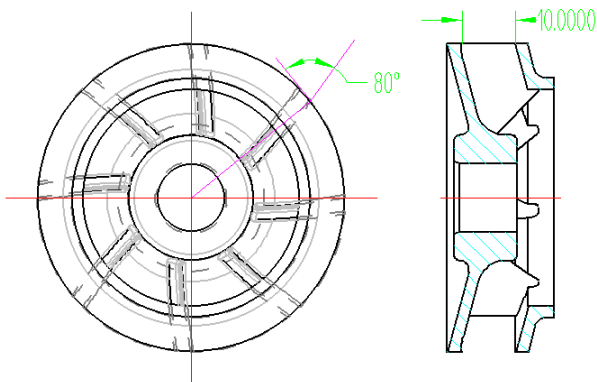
Simplified 2D drawing of the impeller model after optimization
